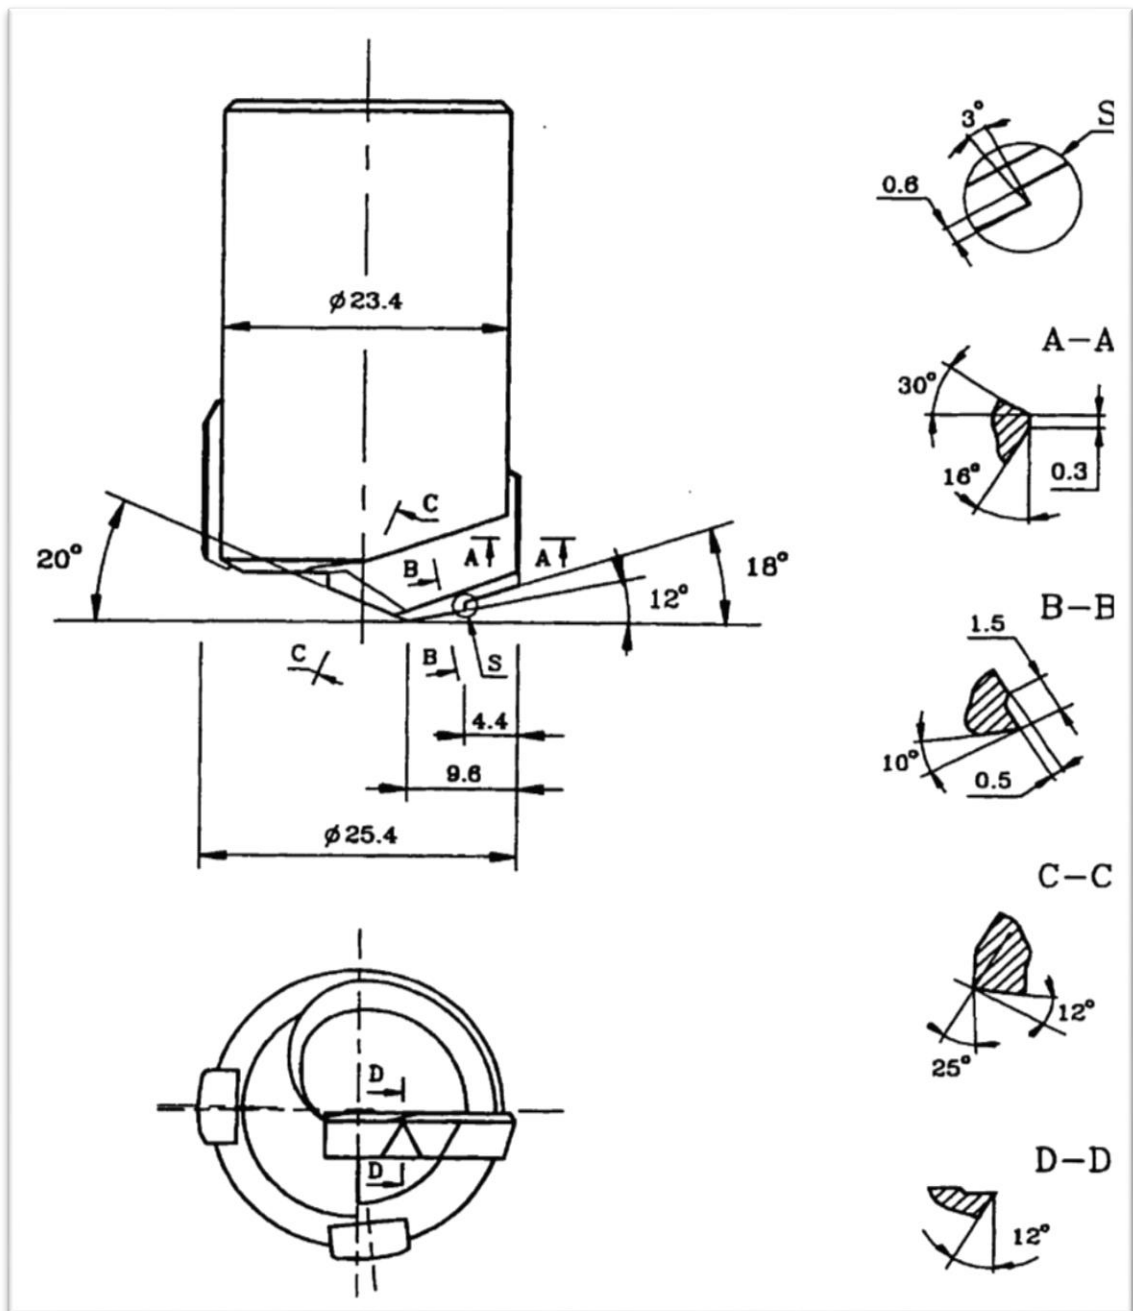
a. BTA-Type Drill of Heller Design (Cutting Geometry)
